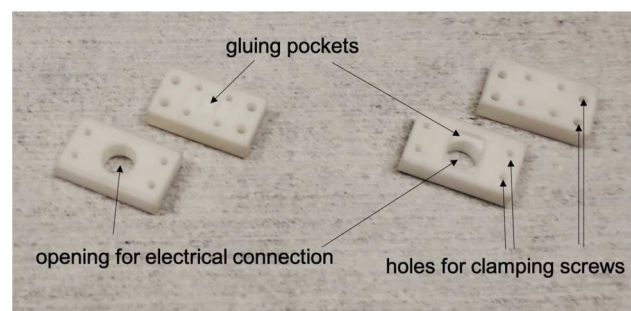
Top side of Macor clamping piece with circular opening for electrical connection (top and upside down, left), and bottom side of Macor clamping piece (top and upside down, right). On the bottom view of each part, the pockets for glue are visible
